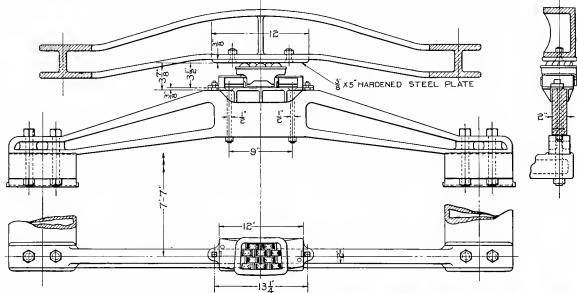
Creco Roller Side Bearing Applied to Bearing Bridge of Six-Wheel Truck.
